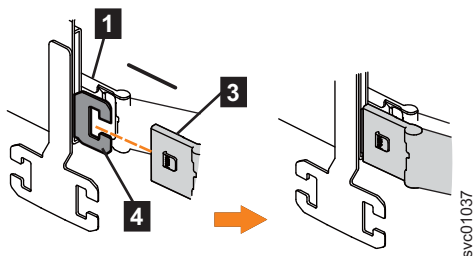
Install the inner connector of the upper CMA to the inner member of the support rail
